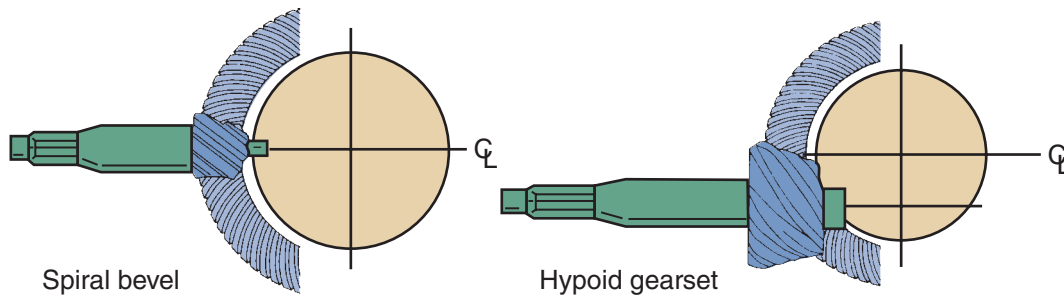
In a hypoid gearset, the drive pinion meshes with the ring gear at a point below its centerline.
